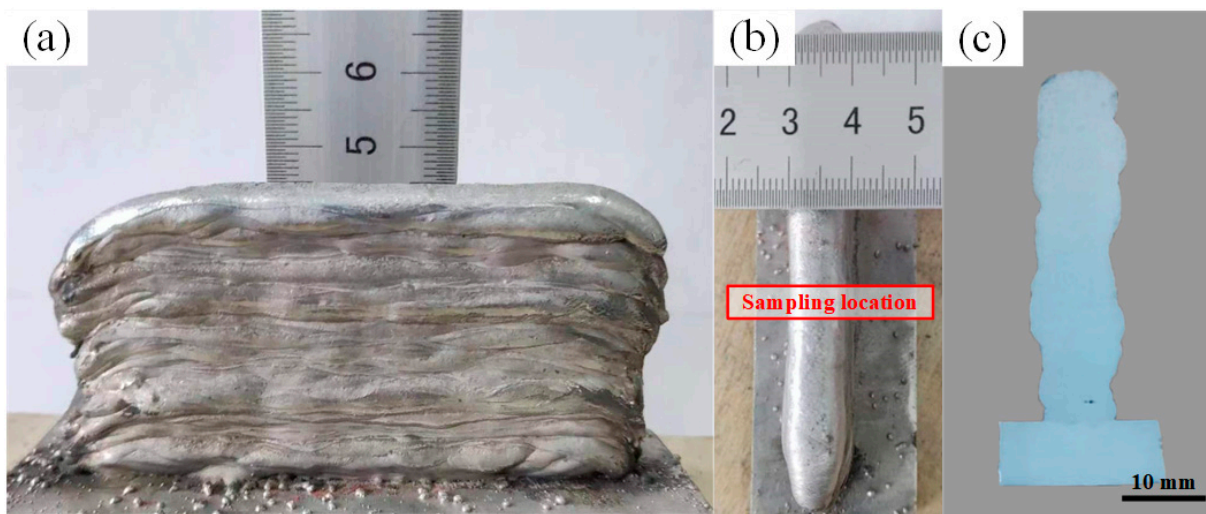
Shape of the WAAM components: (a) sidewall morphology; (b) wall width; (c) metallographic specimen.
